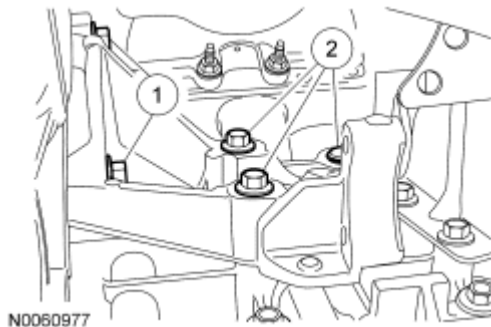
Identifying Transaxle Bolts & Engine Bolts
